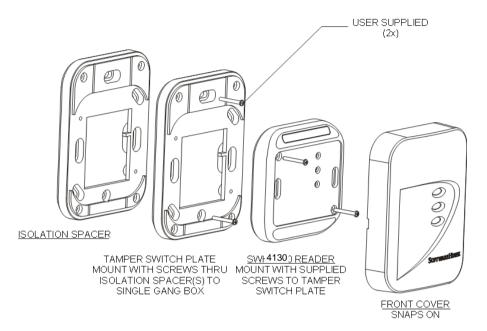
Mounting Assembly (including one optional isolation spacer)
